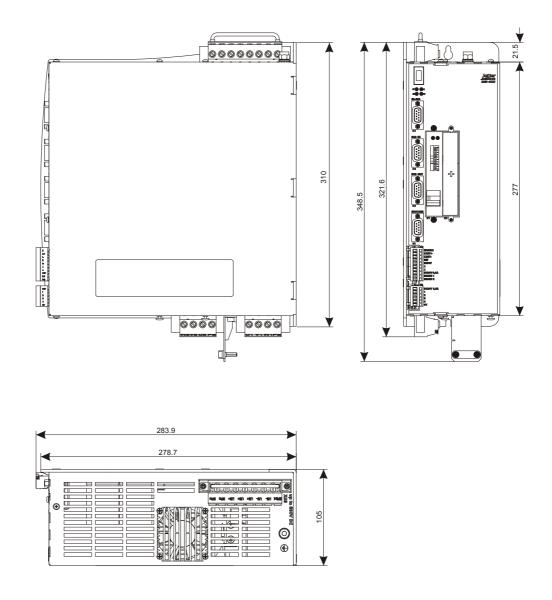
Physical dimensions of the JetMove 215B-480 (in mm)
